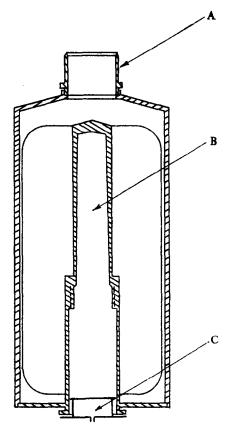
Cross-sectional view of silver calorimeter and spool. A, the knife-edged screw closure for sealing the sample space; B, the (thermometer heater) well; C, the spool for tempering the lead wires.
